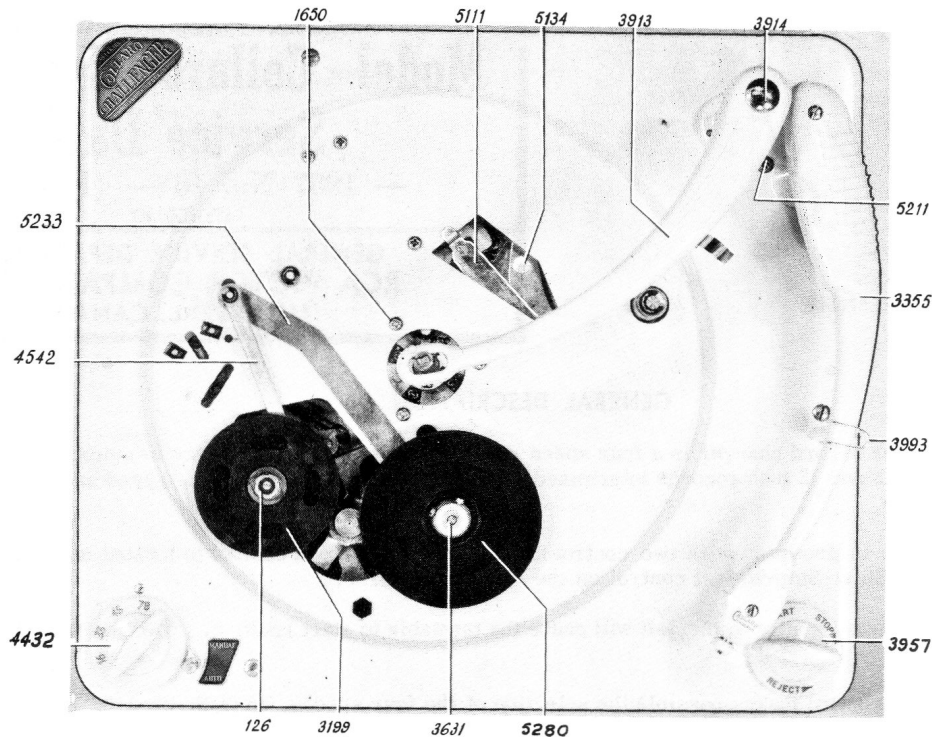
TOP VIEW WITH TURNTABLE REMOVED
